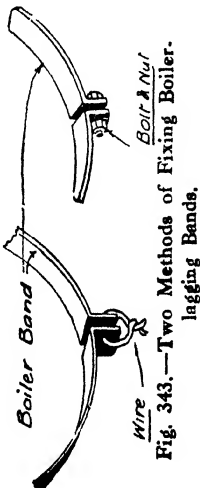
Two Methods of Fixing Boiler-lagging Bands.
